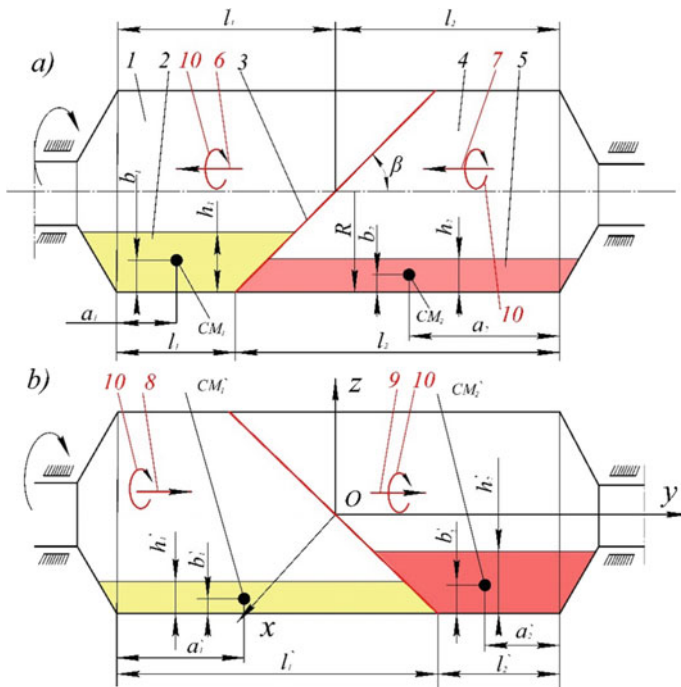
Calculation scheme of a ball-tube mill: 1,4—mill chambers; 3—inclined partition; 2,5—grinding bodies; 6, 7, 8, 9, 10—directions of movement of grinding bodies
